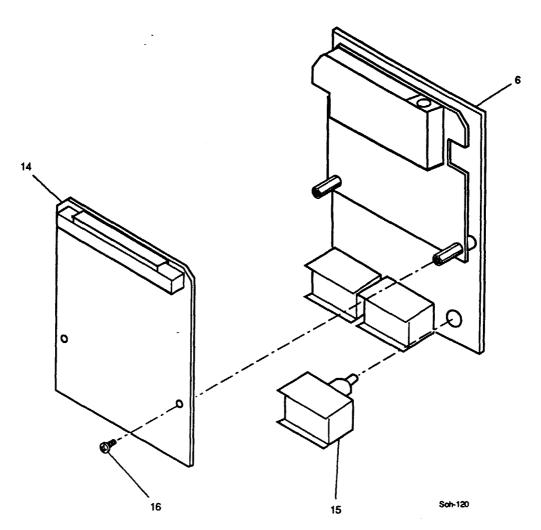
Disassembly of Control Panel Assembly (Sheet 2 of 2)
